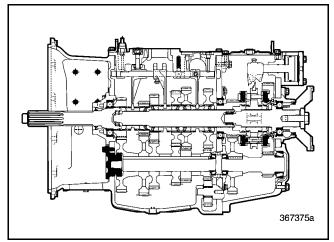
Front Countershaft Front Bearing Cover Component Locator
